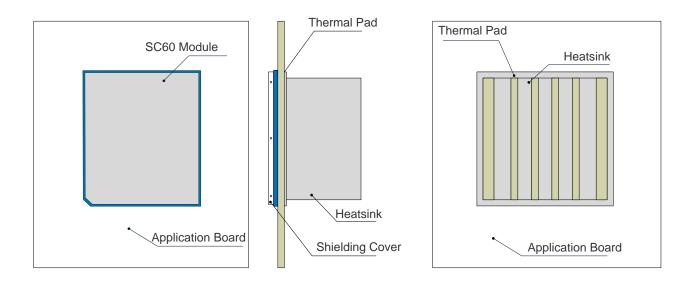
Referenced Heatsink Design (Heatsink at the Backside of Customers' PCB)
